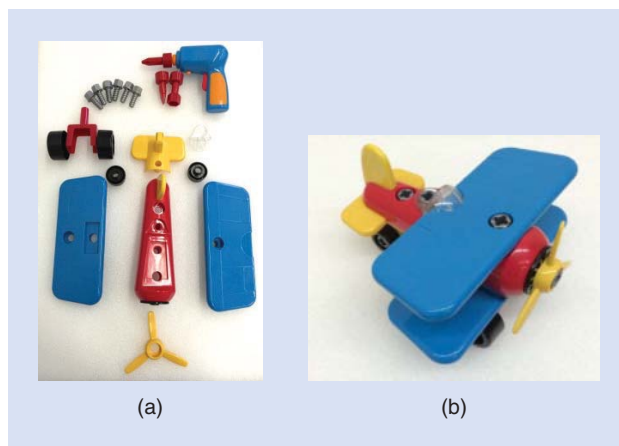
The assembly object: (a) the toy airplane disassembled, including a toy power screwdriver, and (b) the fully assembled airplane.
